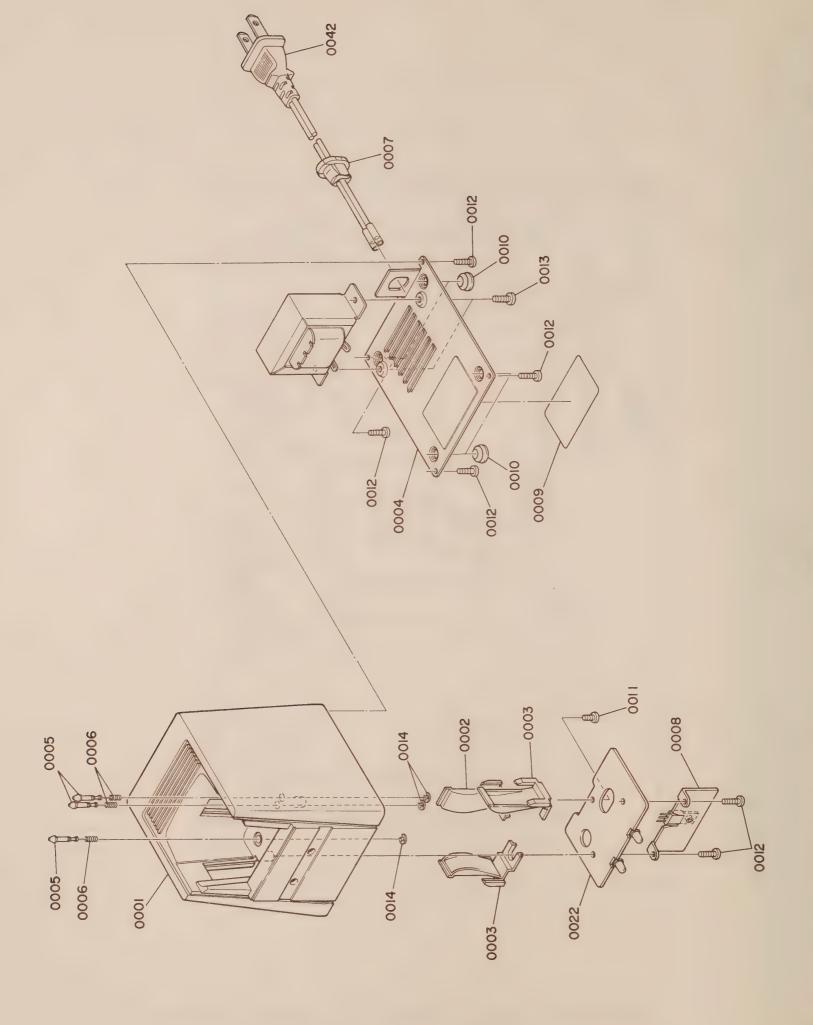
CSA4 SERIES EXPLODED PARTS VIEW
